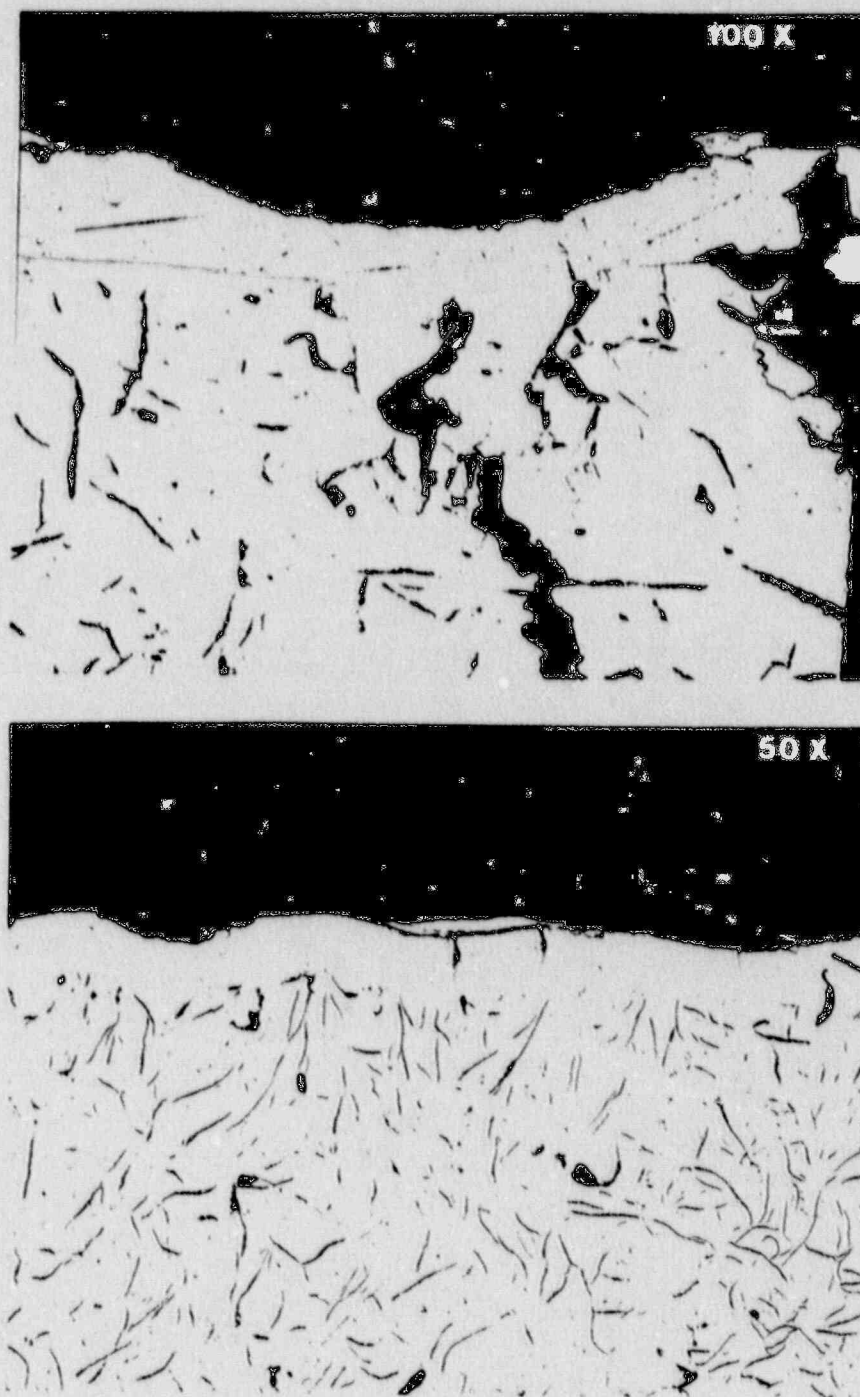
Transverse cross-section(labeled area 'D') taken 7 1/2 inches from the bottom of the B diesel 7L liner showing depressions in the Cr plating surface, cracking of the base metal casting and deposited metal.
